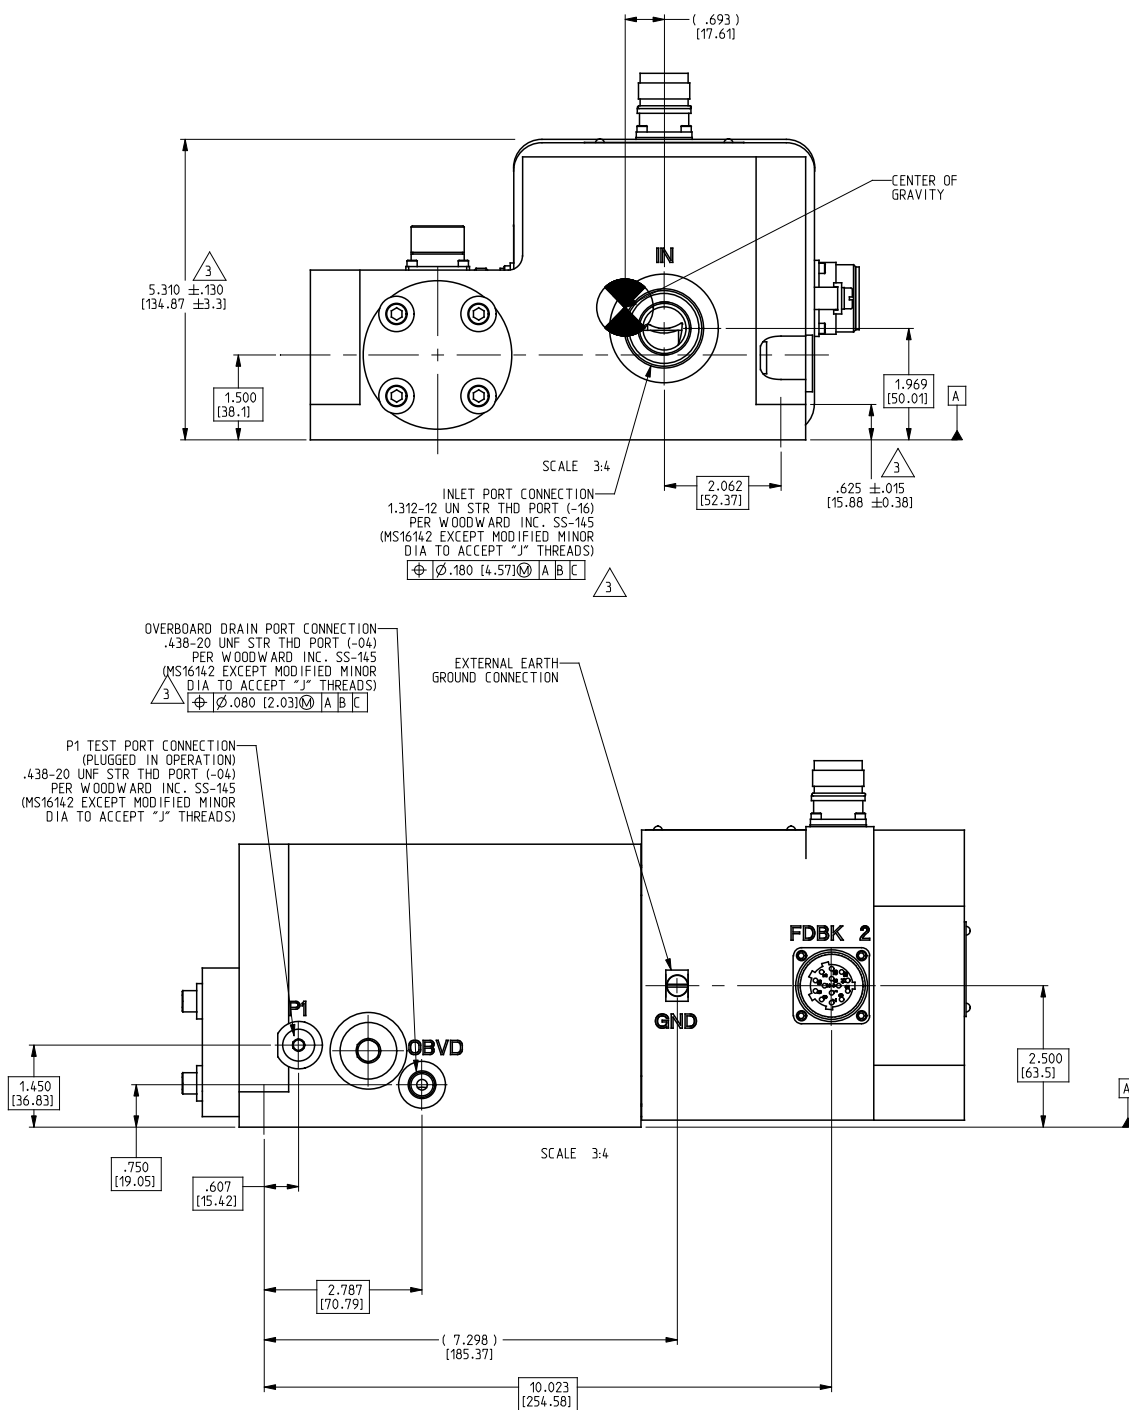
1-Inch LQ25T Outline Drawing
